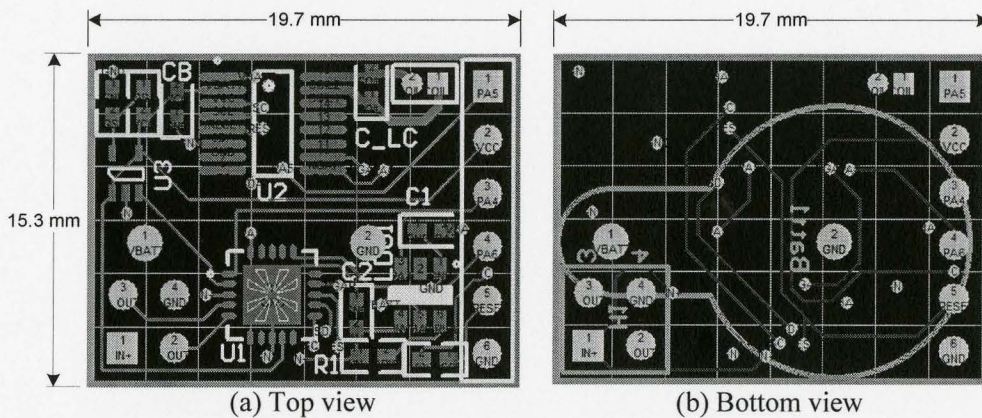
PCB Layout of Transponder System; (a) Top view; (b) Bottom view
